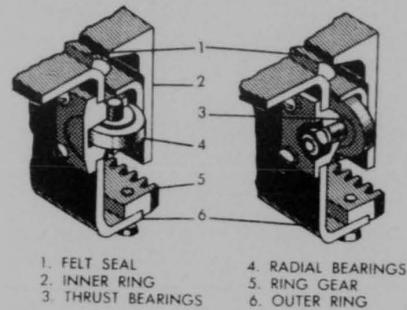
Cutaway of Radial and Thrust Bearings.
